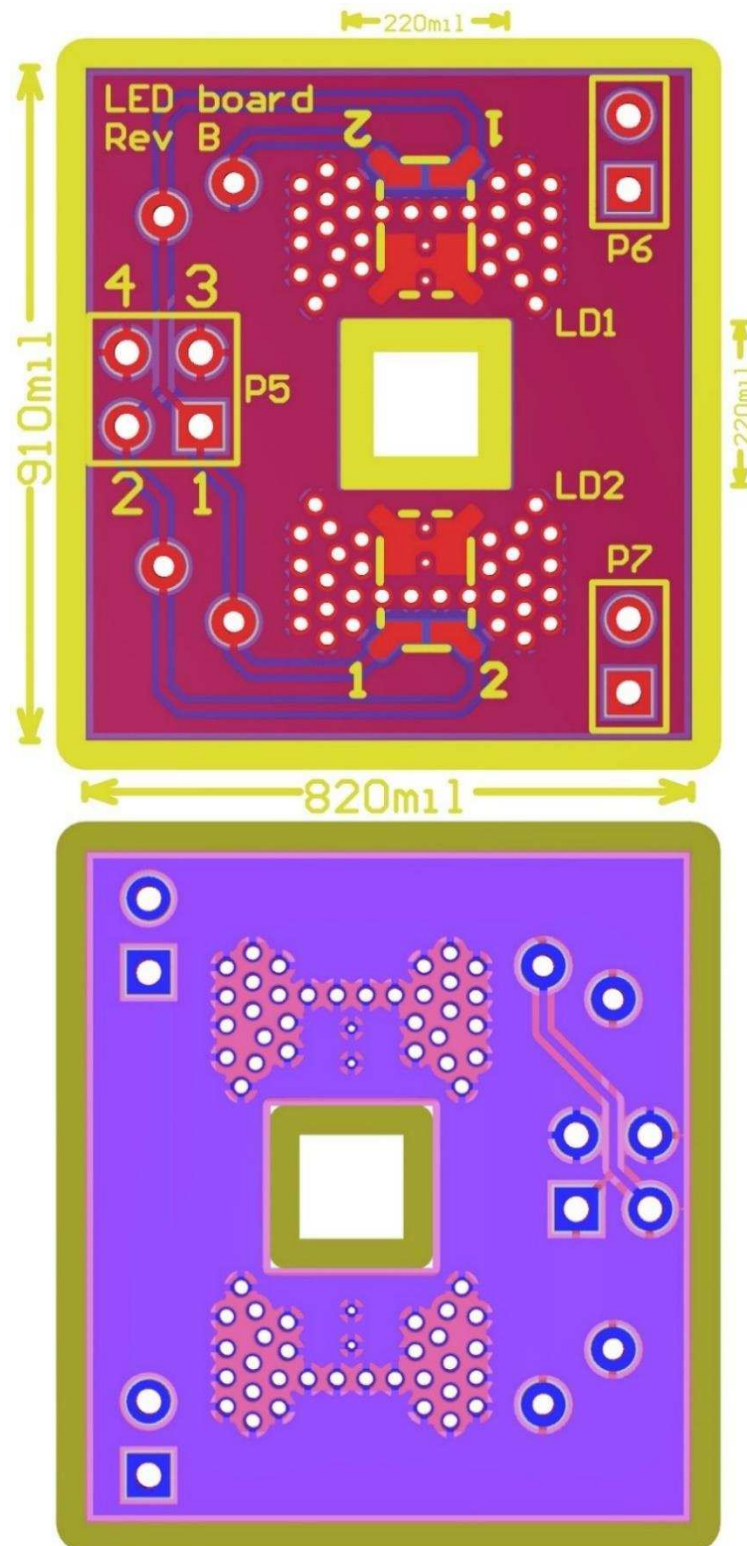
Top and bottom view of CAD-rendered LED PCB.
